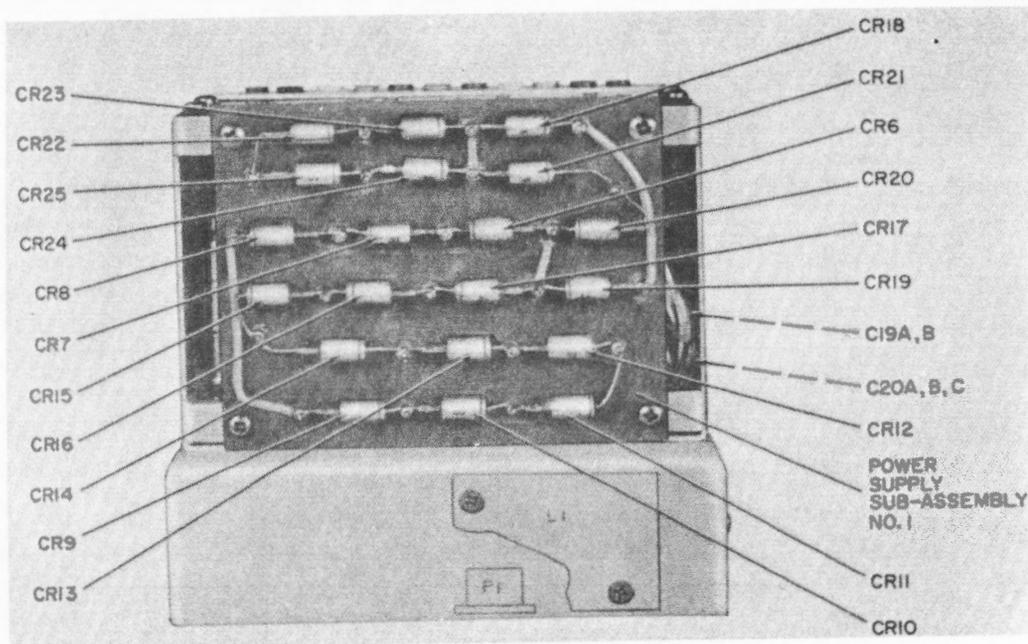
Power Supply PP-3518/PRC-47 (A5), Component Mounting Board Subassembly No. 1, Parts Location
